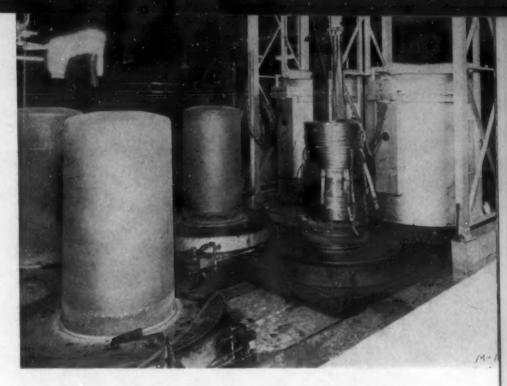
Bell-Type Furnace for Bright Annealing Coiled Cold-Rolled Strip. Equipment of this type is made by several manufacturers.
